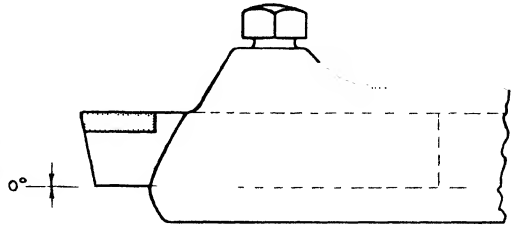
Illustrating Use Requirements of Tool Holder with Carbide Tools
